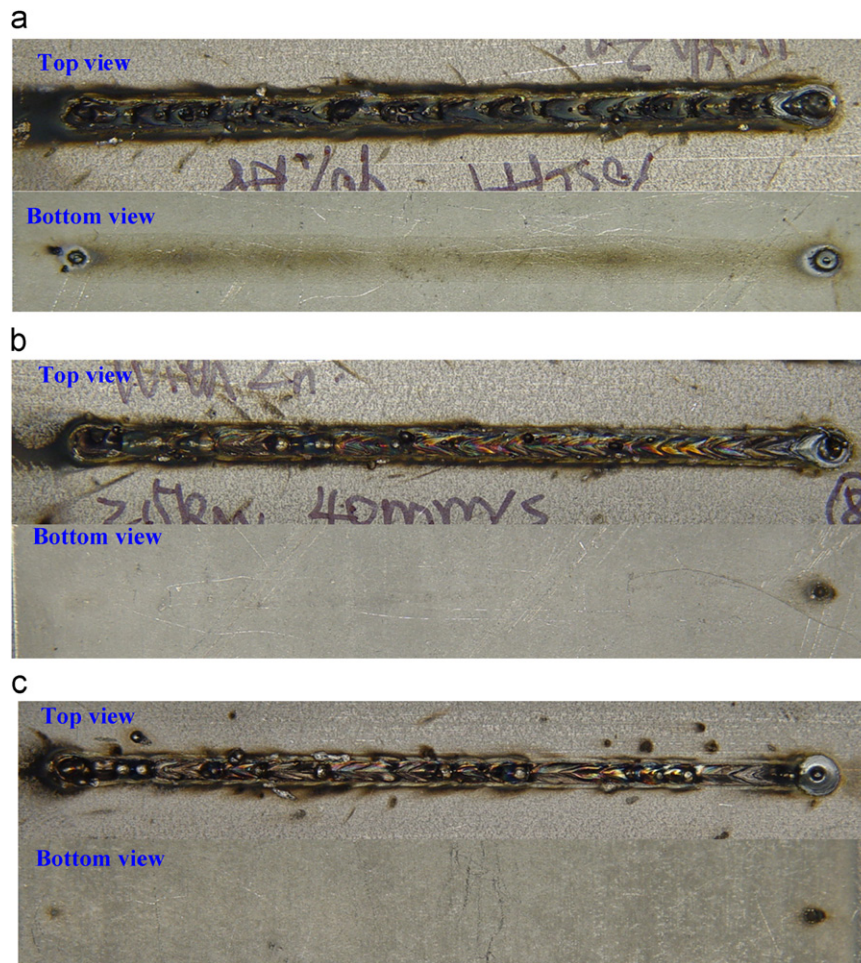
The top and bottom views of DP980 weld obtained by laser power of 2.5 kW and zinc coating at the faying interface remained. (a) $v=30$ mm/s, (b) $v=40$ mm/s, and (c) $v=50$ mm/s.
